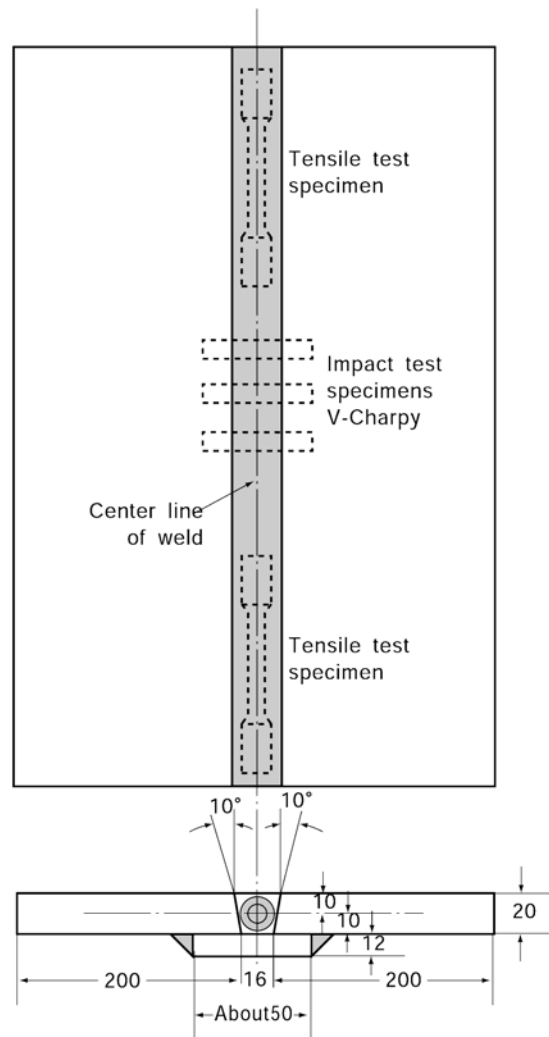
Deposited Metal Test Assembly with Multi-run Technique (Automatic Welding, Unit : mm)
